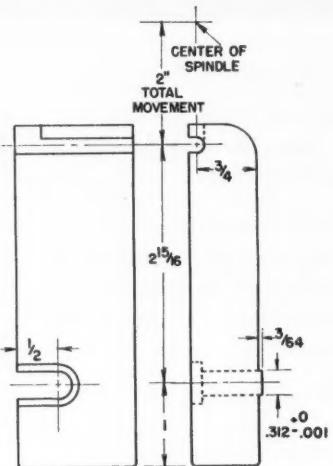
Drawing of Carrier for Use on Double-Movement Cross Slide for B. & S. No. 00G Automatic Screw Machine, Giving Dimensions
